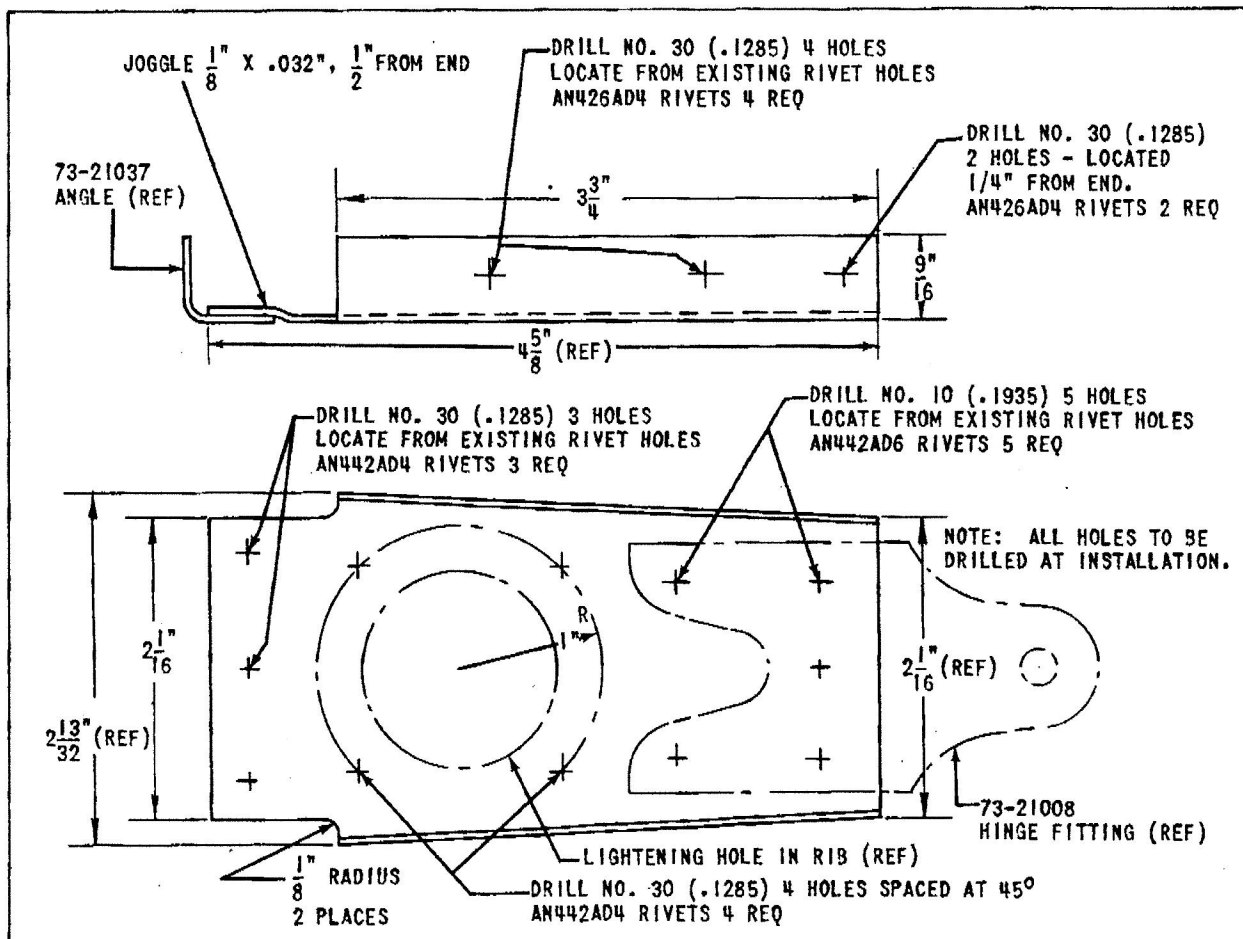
Station 61 1/2 Fin Rib Reinforcing Doubler Channel
